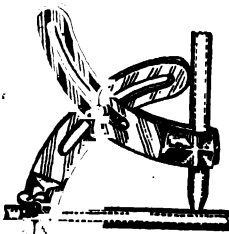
"Footprint" pipe clamp. (Shetack Tool Works, Ltd.)
